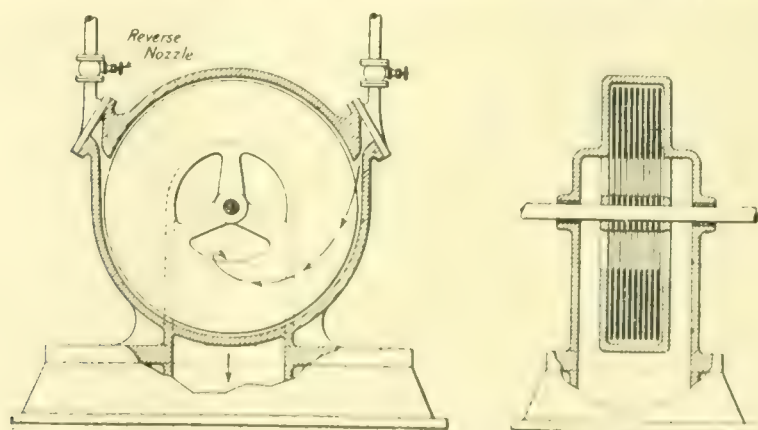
TESLA DISC WHEEL IN A STEAM TURBINE.
